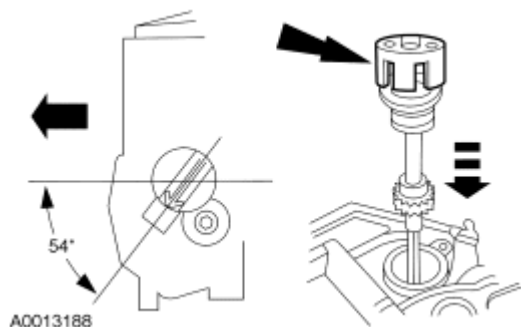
Installing Camshaft Synchronizer Housing Assembly So Arrow On Synchronizer Alignment Tool Is 54 Degrees From Centerline Of The Engine
